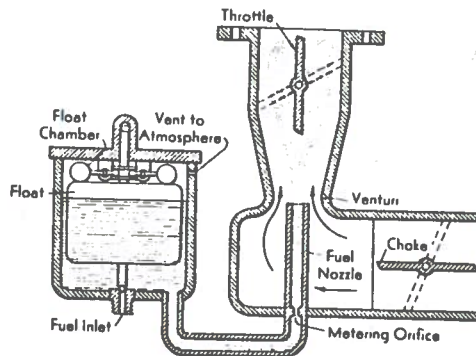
Elements of a Simple Updraft Carburetor (Ref. 1)
